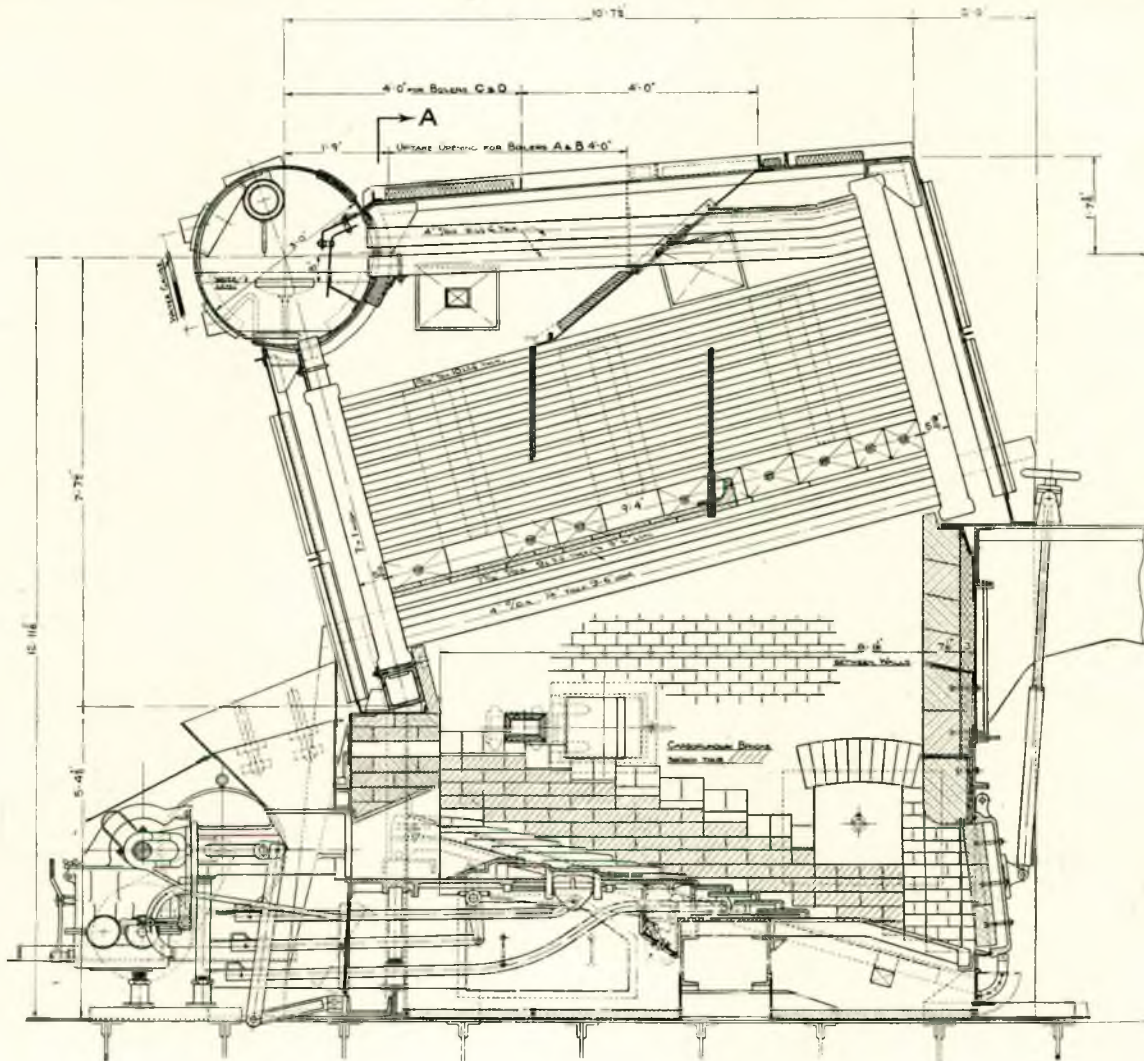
Cross section of boiler and stoker in "Princess Maud".
